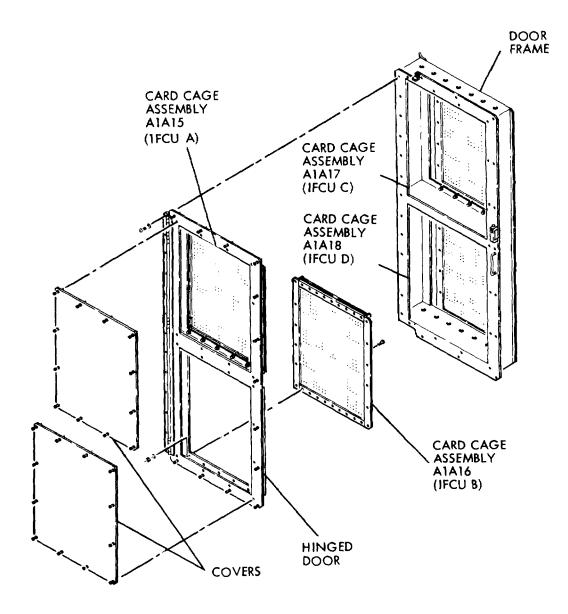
Message Switch ADP Assembly (Sheet 3 of 5).
